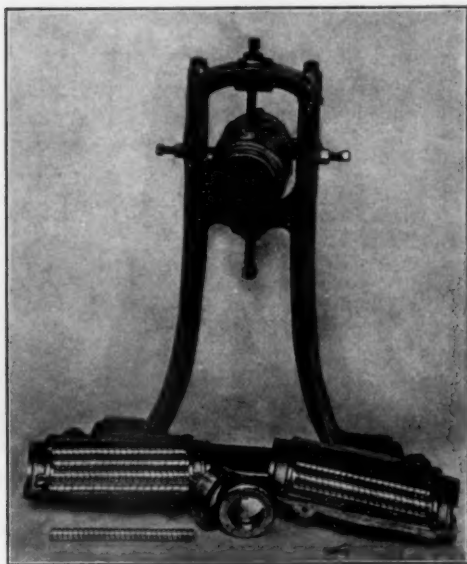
TYPE OF ROLLER BEARING USED IN TESTS
